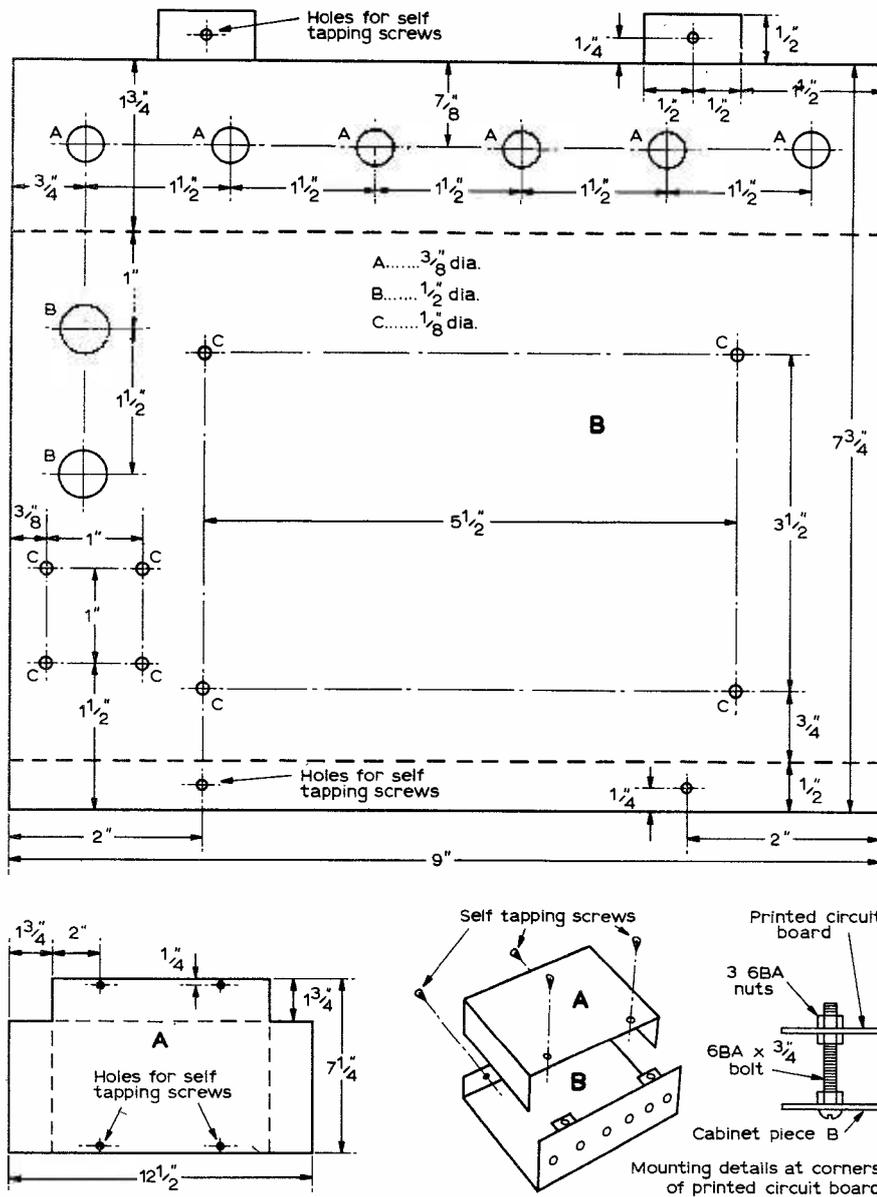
The cutting and drilling details of the two piece aluminium cabinet.
